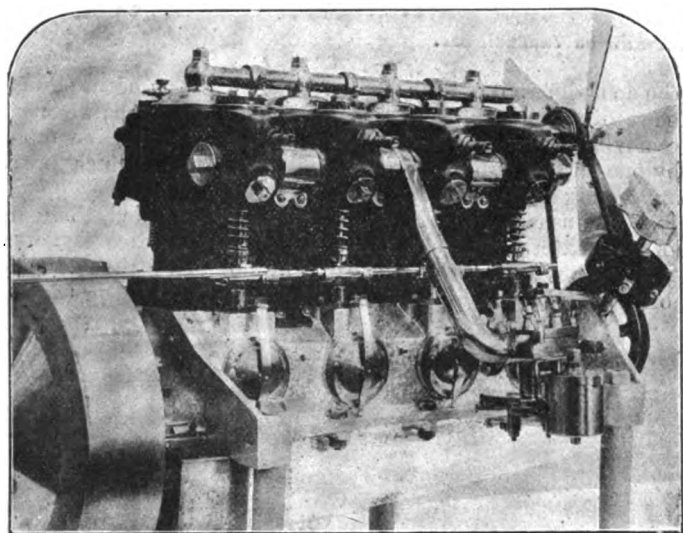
View of Inlet Side of Vauxhall Engine.
